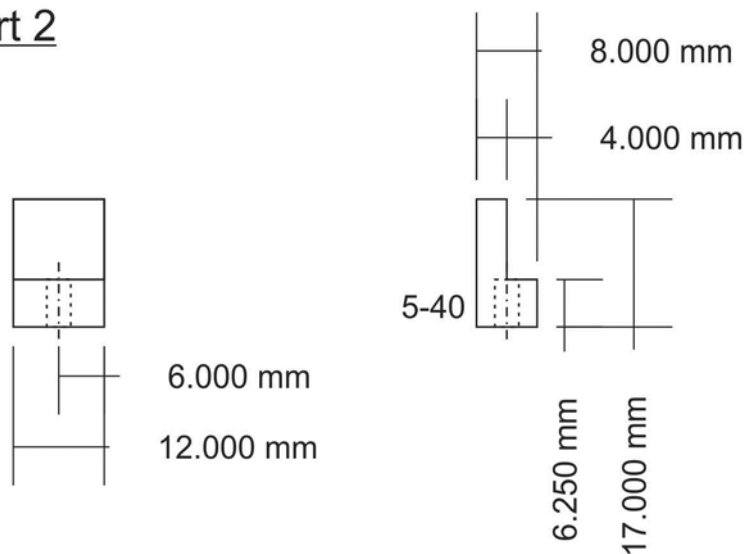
Micrometer screw attachment for a wire stripper. A micrometer screw has been attached, with the above shown braces, to a wire stripper.
